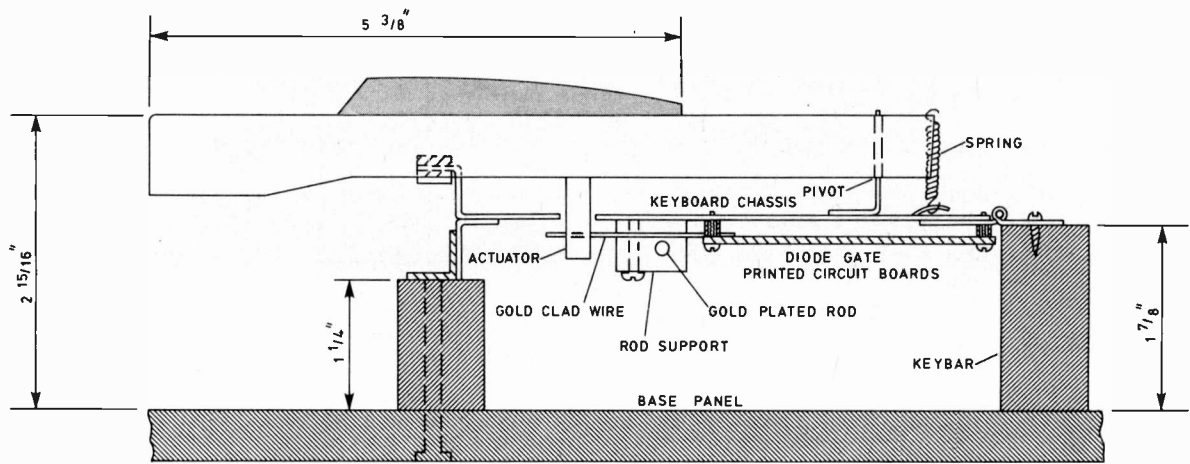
Keyswitch and Diode Gate p.c.b. mounting detail
